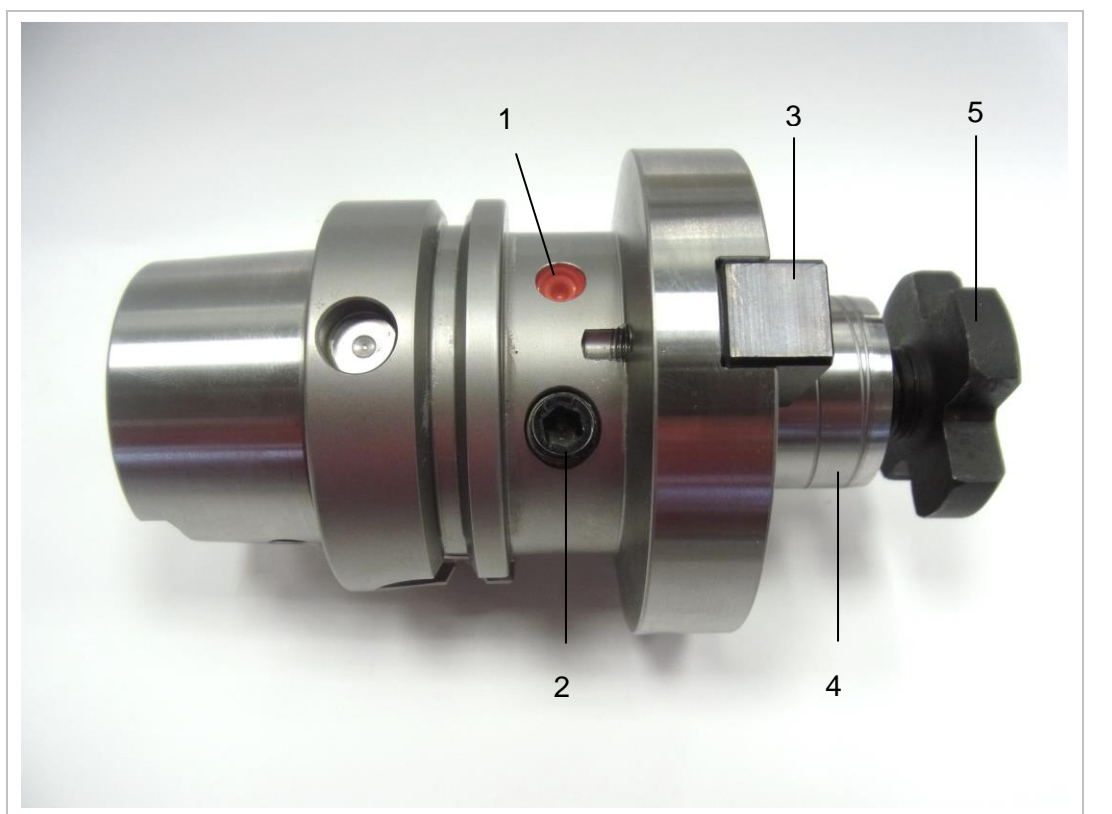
Individual components of the hydraulic chuck with axial tool length adjustment
